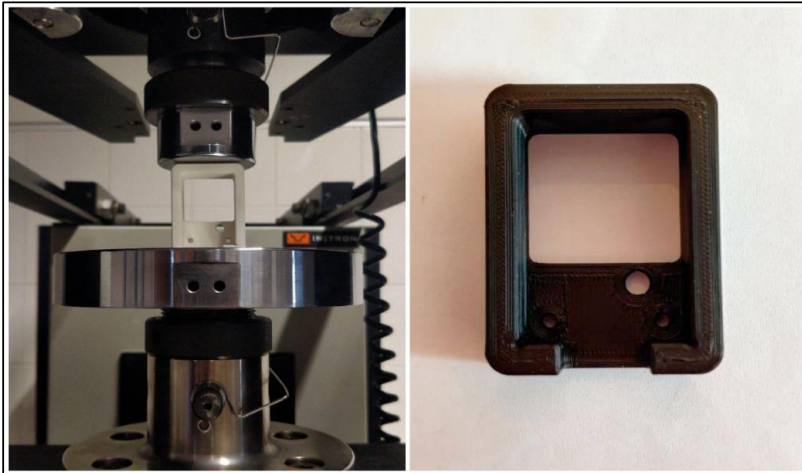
ABS [Left] loaded to the compressive test machine and ASA [Right] miniature jigs are shown in the figure. It should be noted that both the parts were manufactured using the rectilinear Infill pattern.
